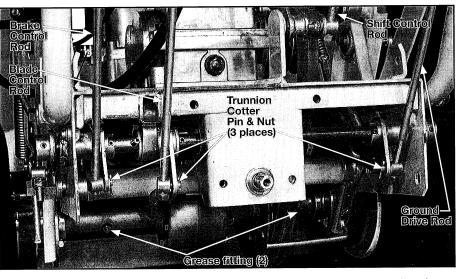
Blade Drive Lever Adjustment (rear shield removed to show linkage)
